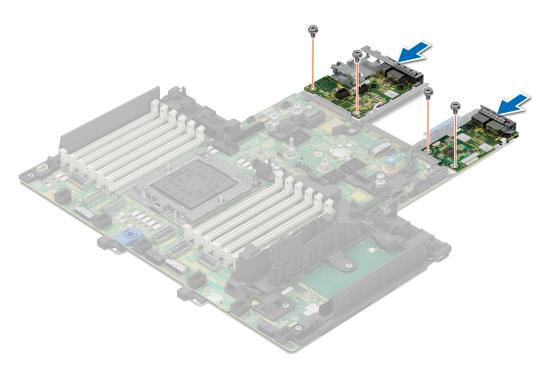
Installing the LOM card and Liquid cooling rear I/O board
